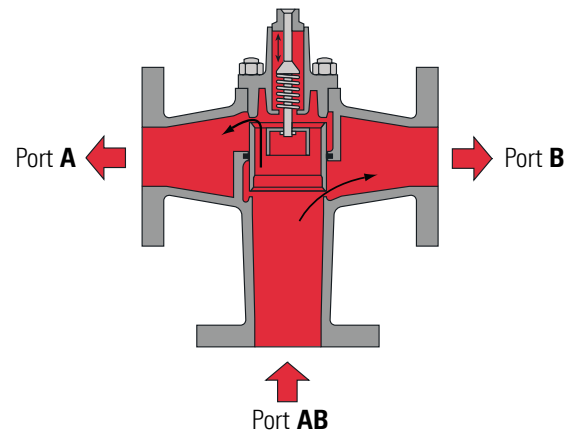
Piston valve (shown as a diverting valve)
